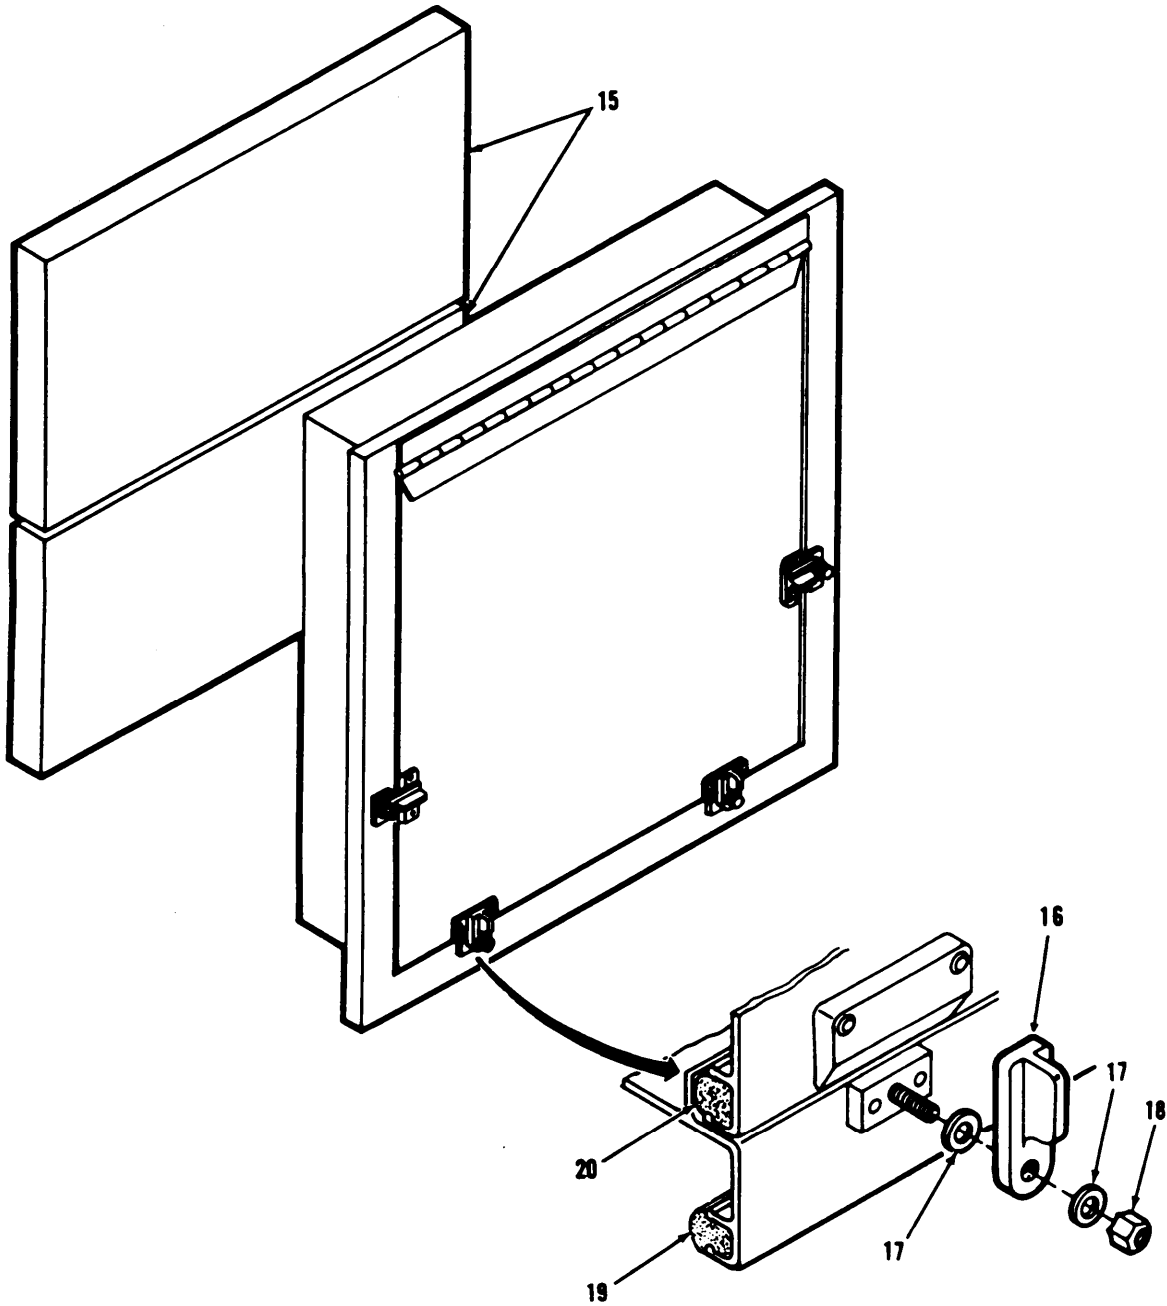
Shelter, Electrical Equipment S-280C/G (Sheet 2 of 2).
